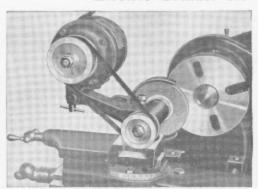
Electric Grinder Mounted on Compound Rest of Lathe
